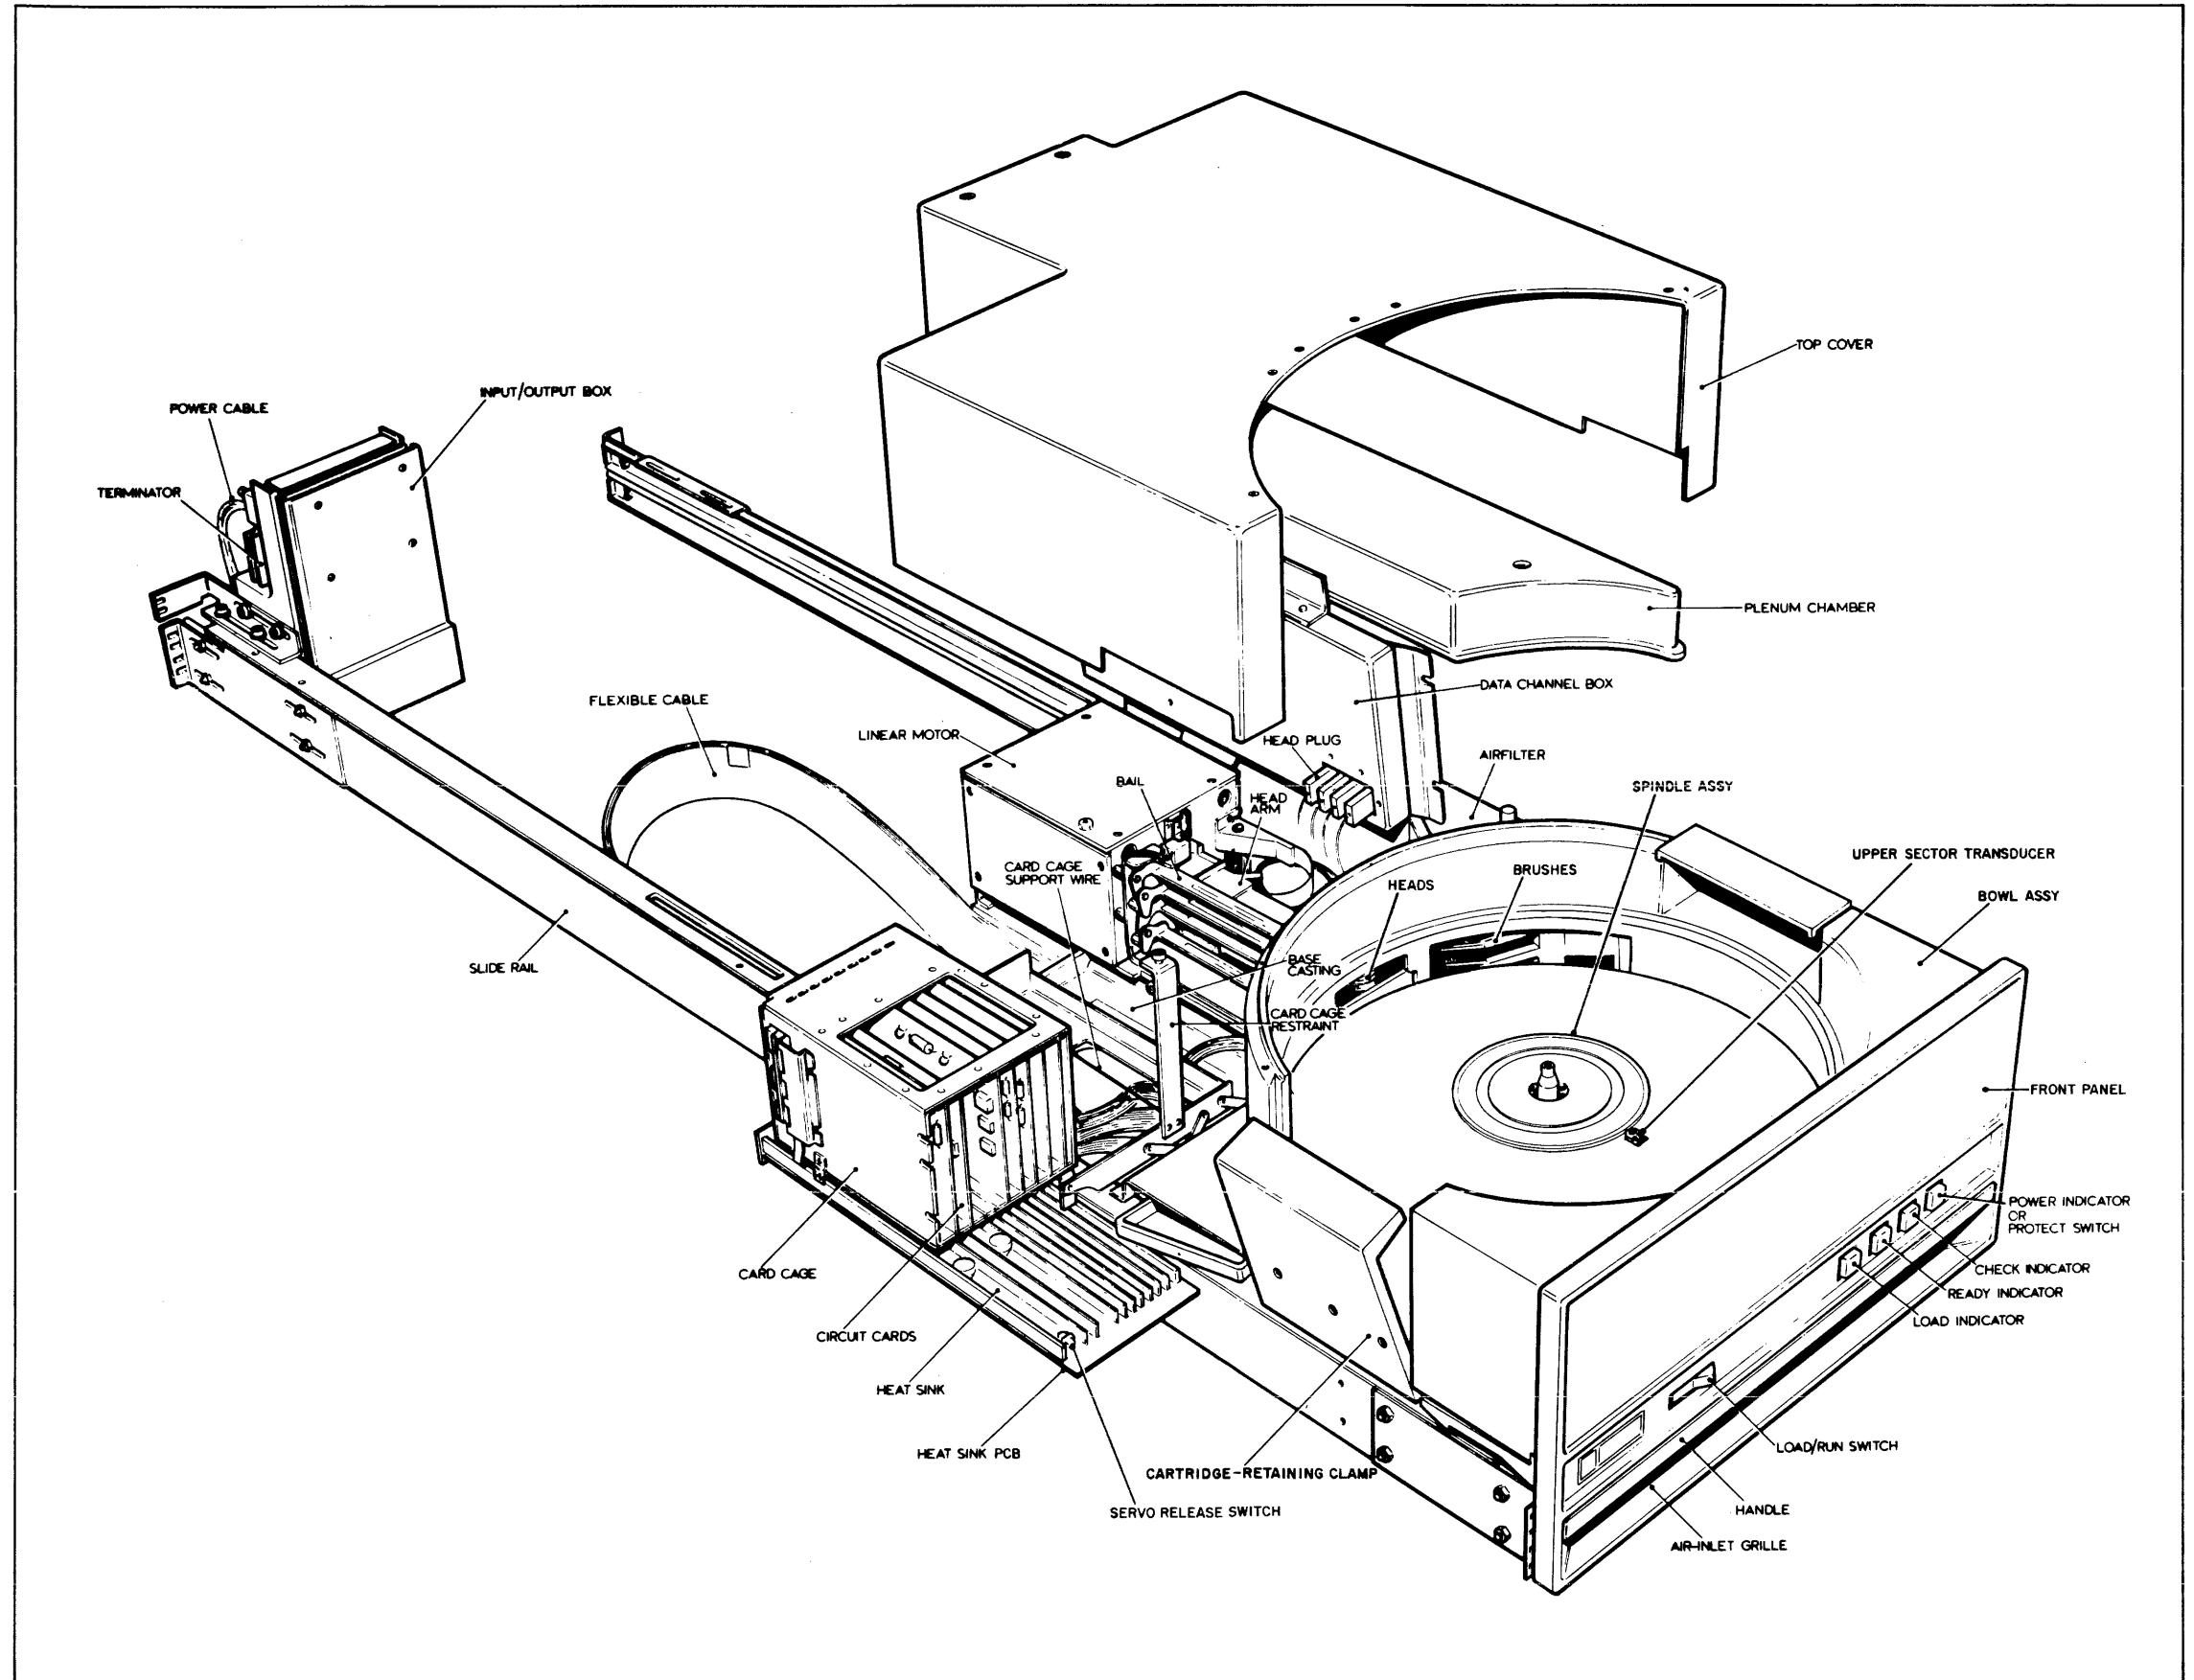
Location of Assemblies Series 40 Disk Drive
